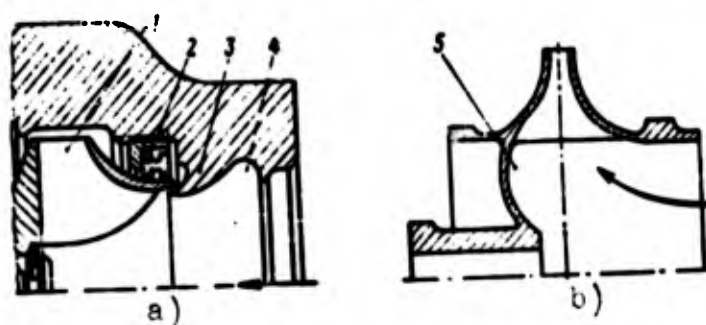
Pump impellers of a turbopump assembly with widening of the inlet duct:
